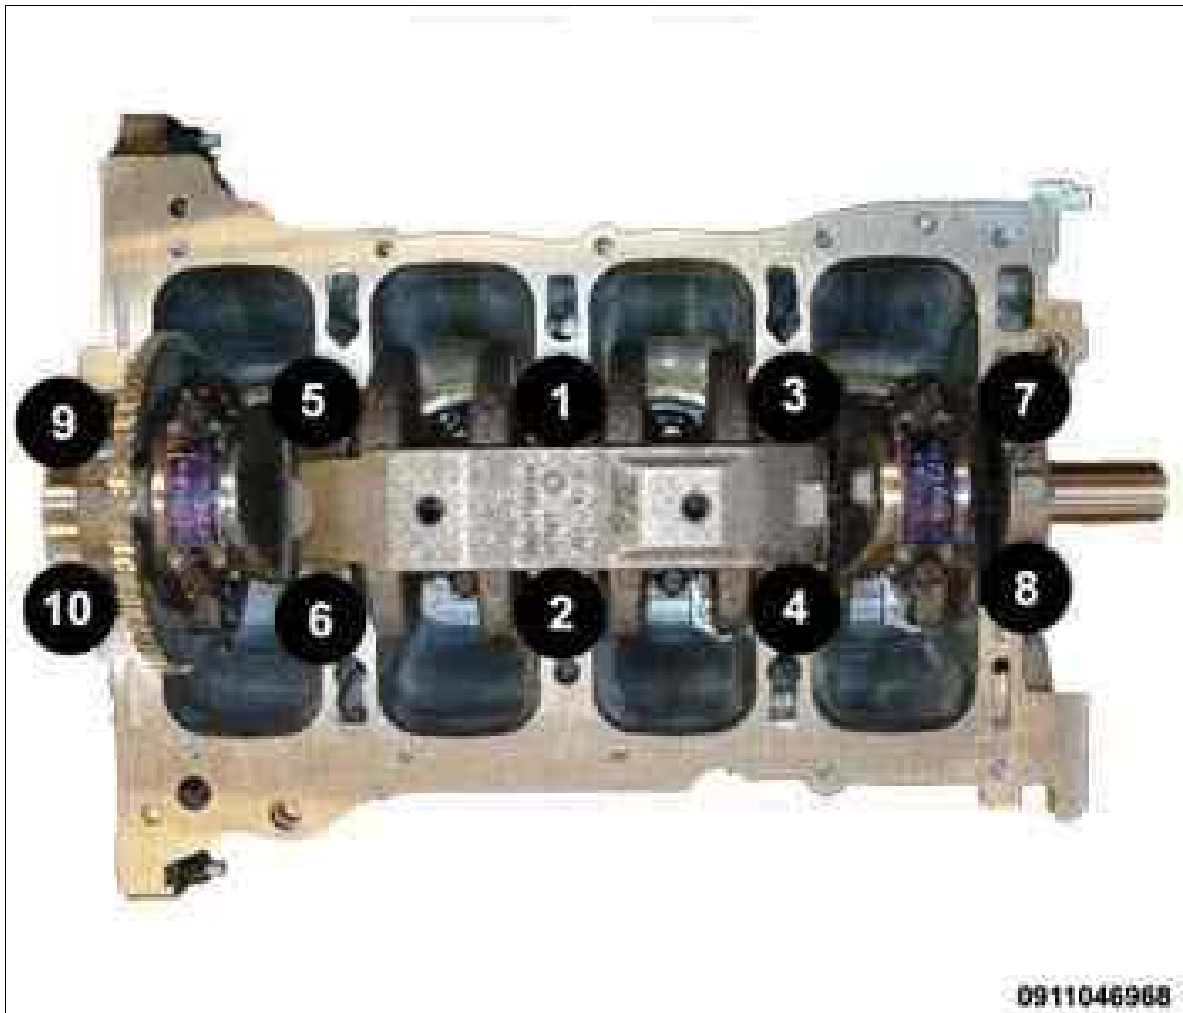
Bearing Beam Installed With Indication Pointing To Front Of Engine
